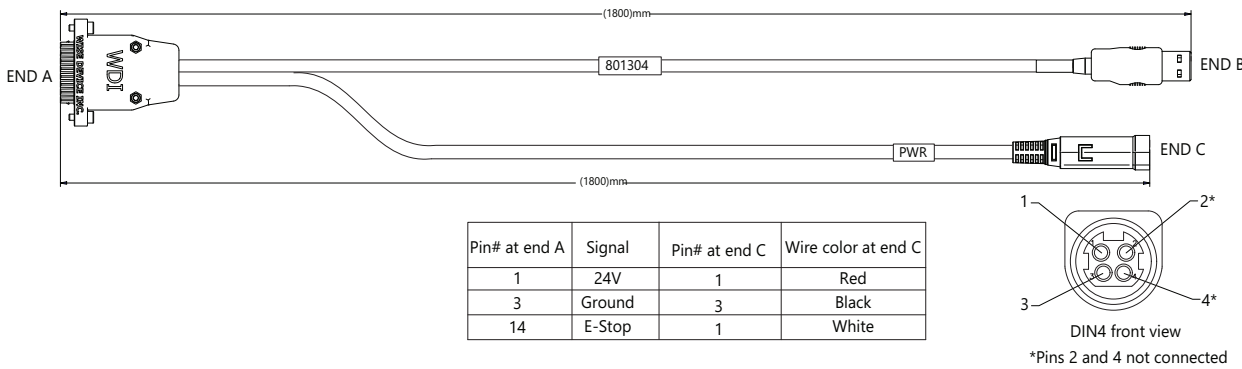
CAB-PFABUS-PWR/USB TO RS485 DIN4 Cable Wiring
